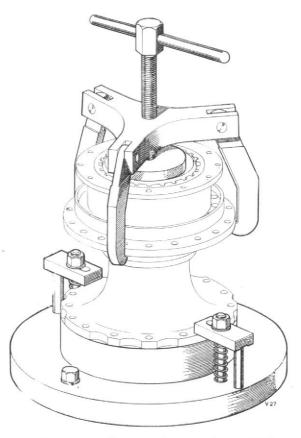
Bench fixture T.72411, adapter T.73069 and extractor T.73068, for removing rear bearing housing assembly from extension shaft.
